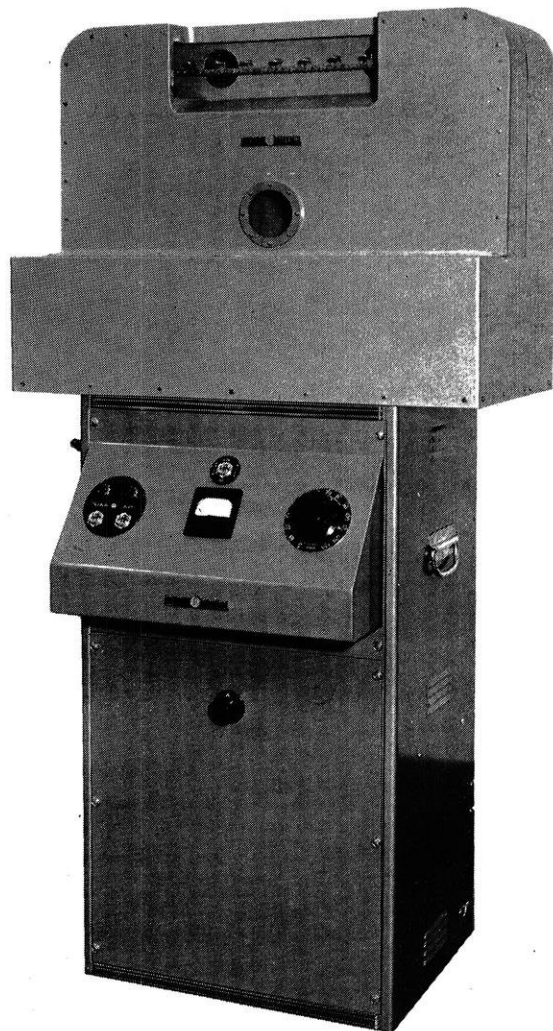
Ultrasonic degreaser built for Schick, Inc., with conveyer equipment and tank for cleaning solution surmounting the generator.
